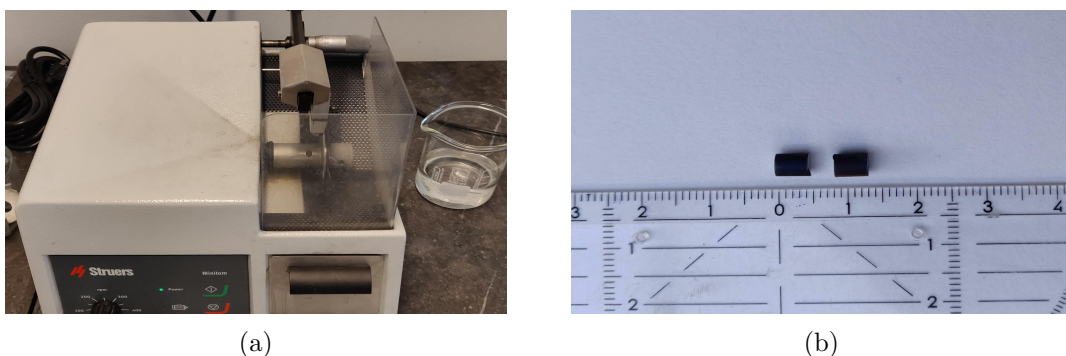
(a) Samples being cut on Struers Minitom gravity-fed cutting machine. (b) Samples cut in half.
